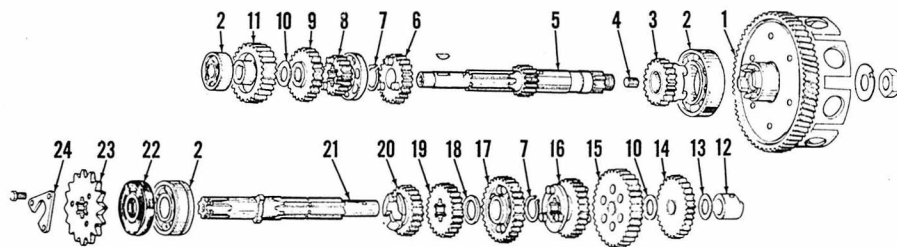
Exploded view of transmission gears and shafts. Clutch drum (1) is on right end of transmission input shaft (5).
